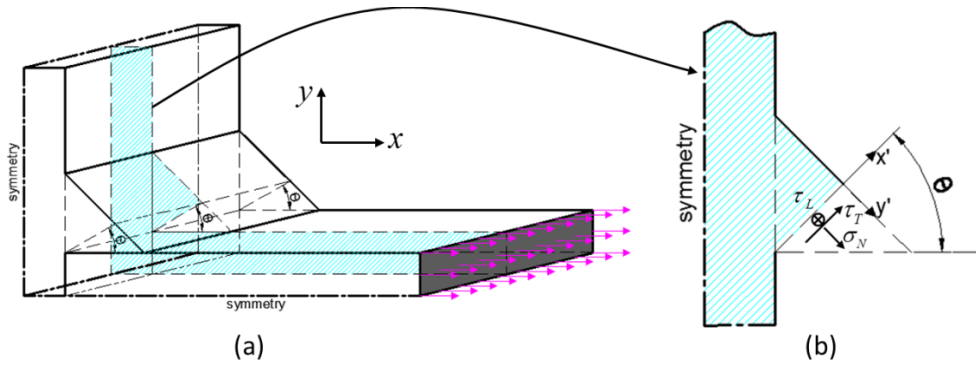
Traction stresses on a hypothetical cut plane across fillet weld in a load-carrying fillet weld: (a) A representative cross-section along fillet weld; (b) free body diagram representation after a hypothetical cut through weld root at an angle θ
